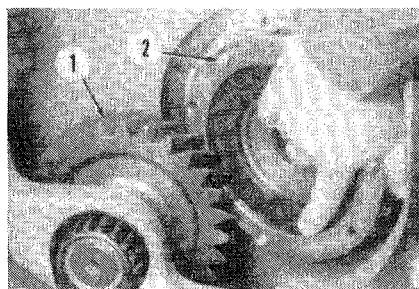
On Models 4650 and 4850, pto brake (2) must be removed to provide clearance for removal of idler gear (1).
